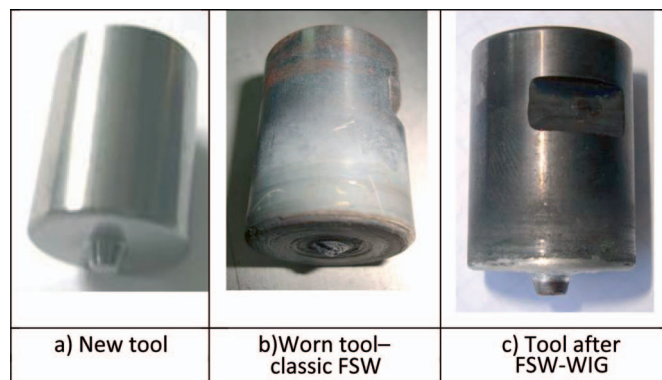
Welding tools before and after welding FSW / FSW-TIG
